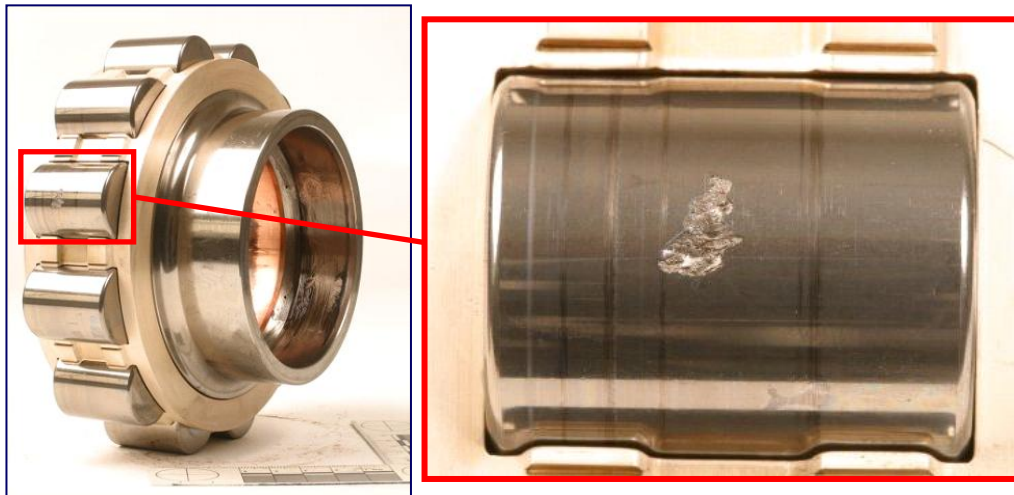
Case 5 - Photos showing damage to combiner bearing rolling element
